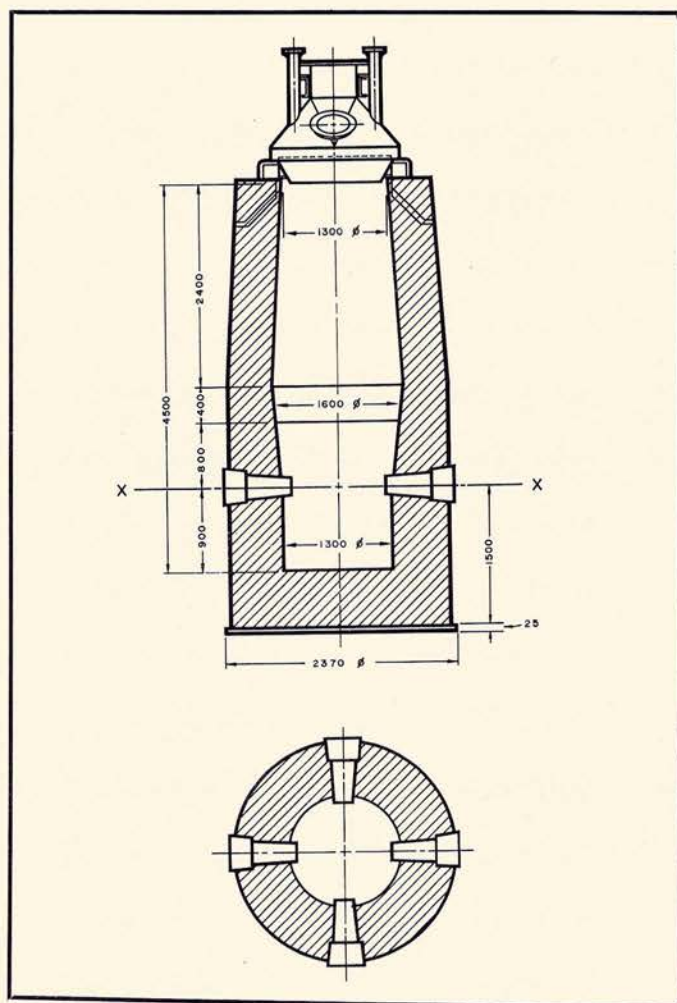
A section through shaft & hearth of the Jamshedpur low-shaft furnace.
